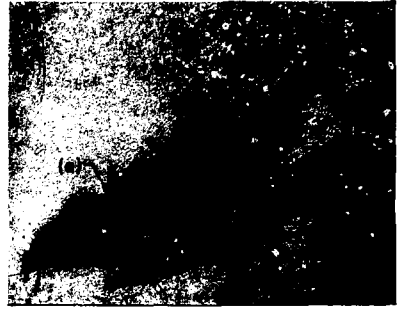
Lack-of-fusion defect (a) near fusion line (b) in weld No. 52. A flat-position weld made with Kryokay electrodes, magnified 63 times.
